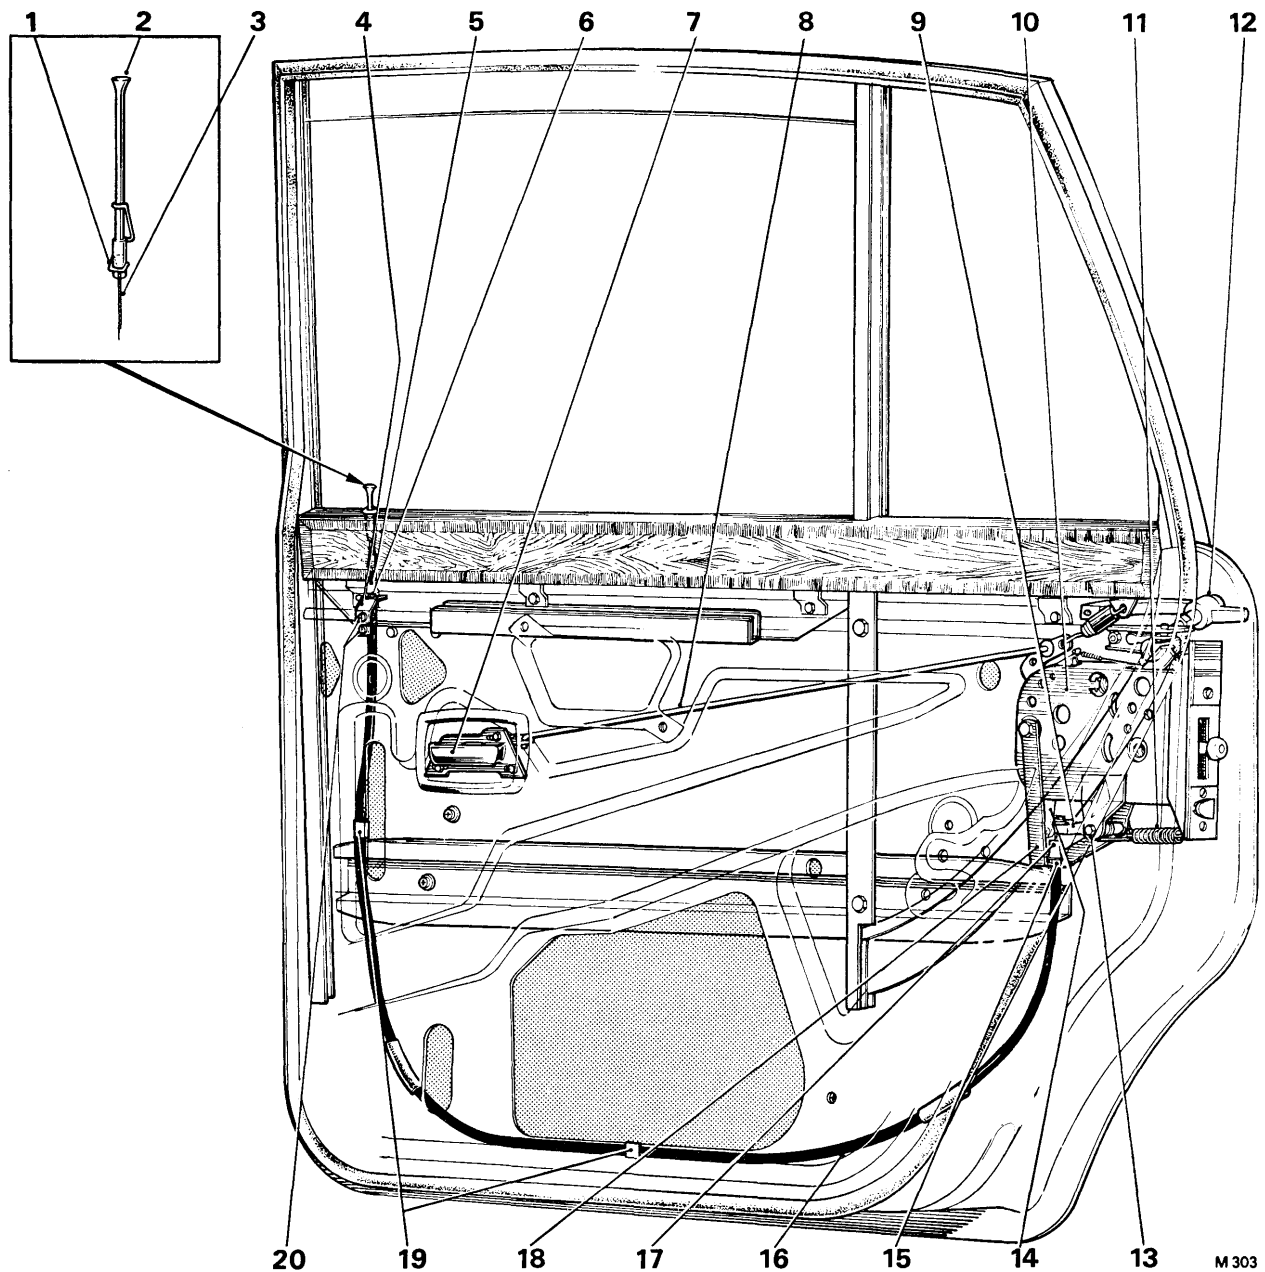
REAR DOOR LOCKING MECHANISM (4-Door Saloon and Long Wheelbase Cars with cable operated sill lock button)
